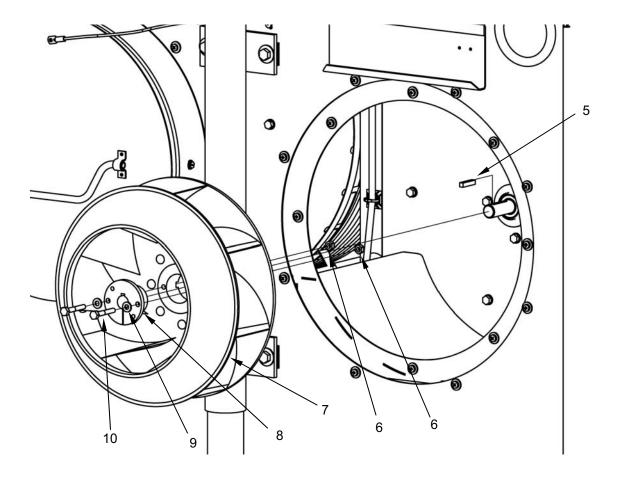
Inlet Fan Assembly (Sheet 2 of 3) 0100 00-3
